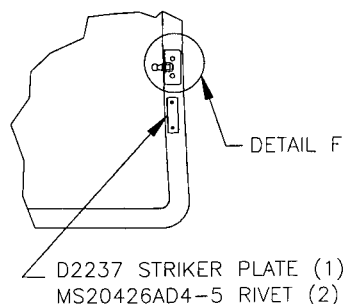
TYPICAL DOOR FRAME (AFT EDGE)
